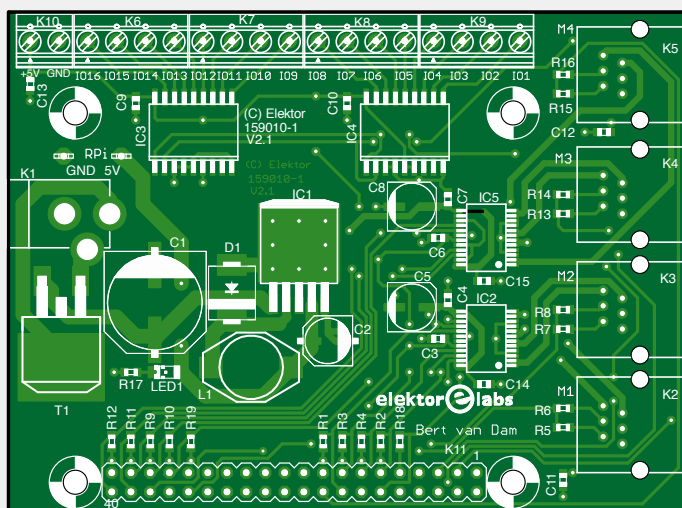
The layout of the circuit board. The 40-way connector K11 is mounted on the bottom of the circuit board.
